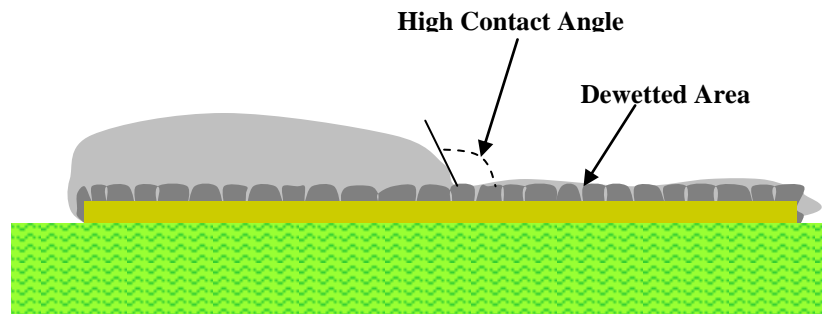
Dewetting of pad where there was insufficient thickness of solder over the intermetallic layer
